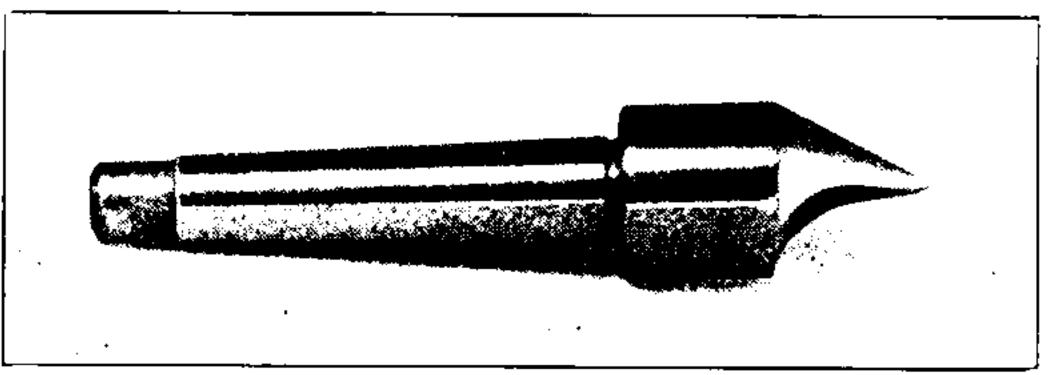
Half Male Center — head is hardened, $\frac{27}{32}$ " diameter, half cut away leaving small point, to provide clearance for turning tool when facing ends of work. Also useful for external grinding
